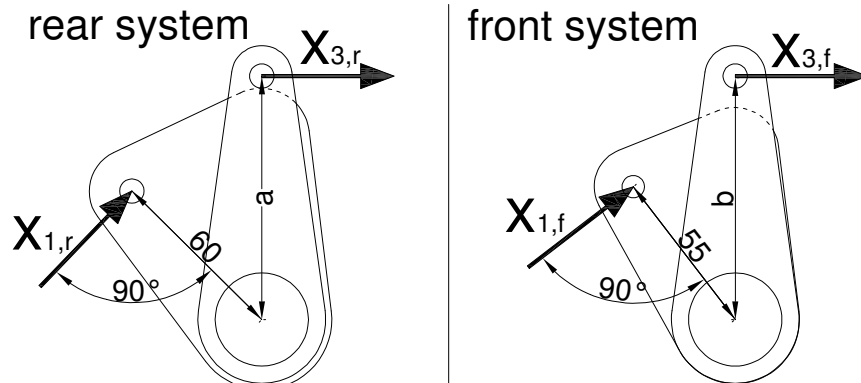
Rocker and lever arm dimensions of front and rear suspension box
